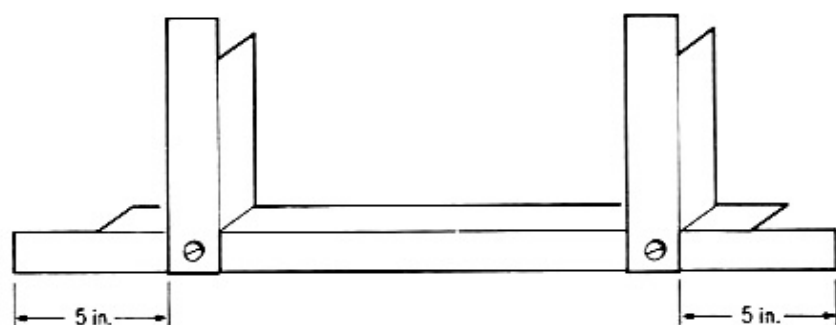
Aluminum bolted to each piece of lower triangle.
